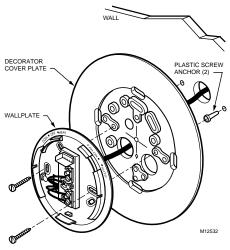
Mounting decorator cover plate and wallplate to wall.
